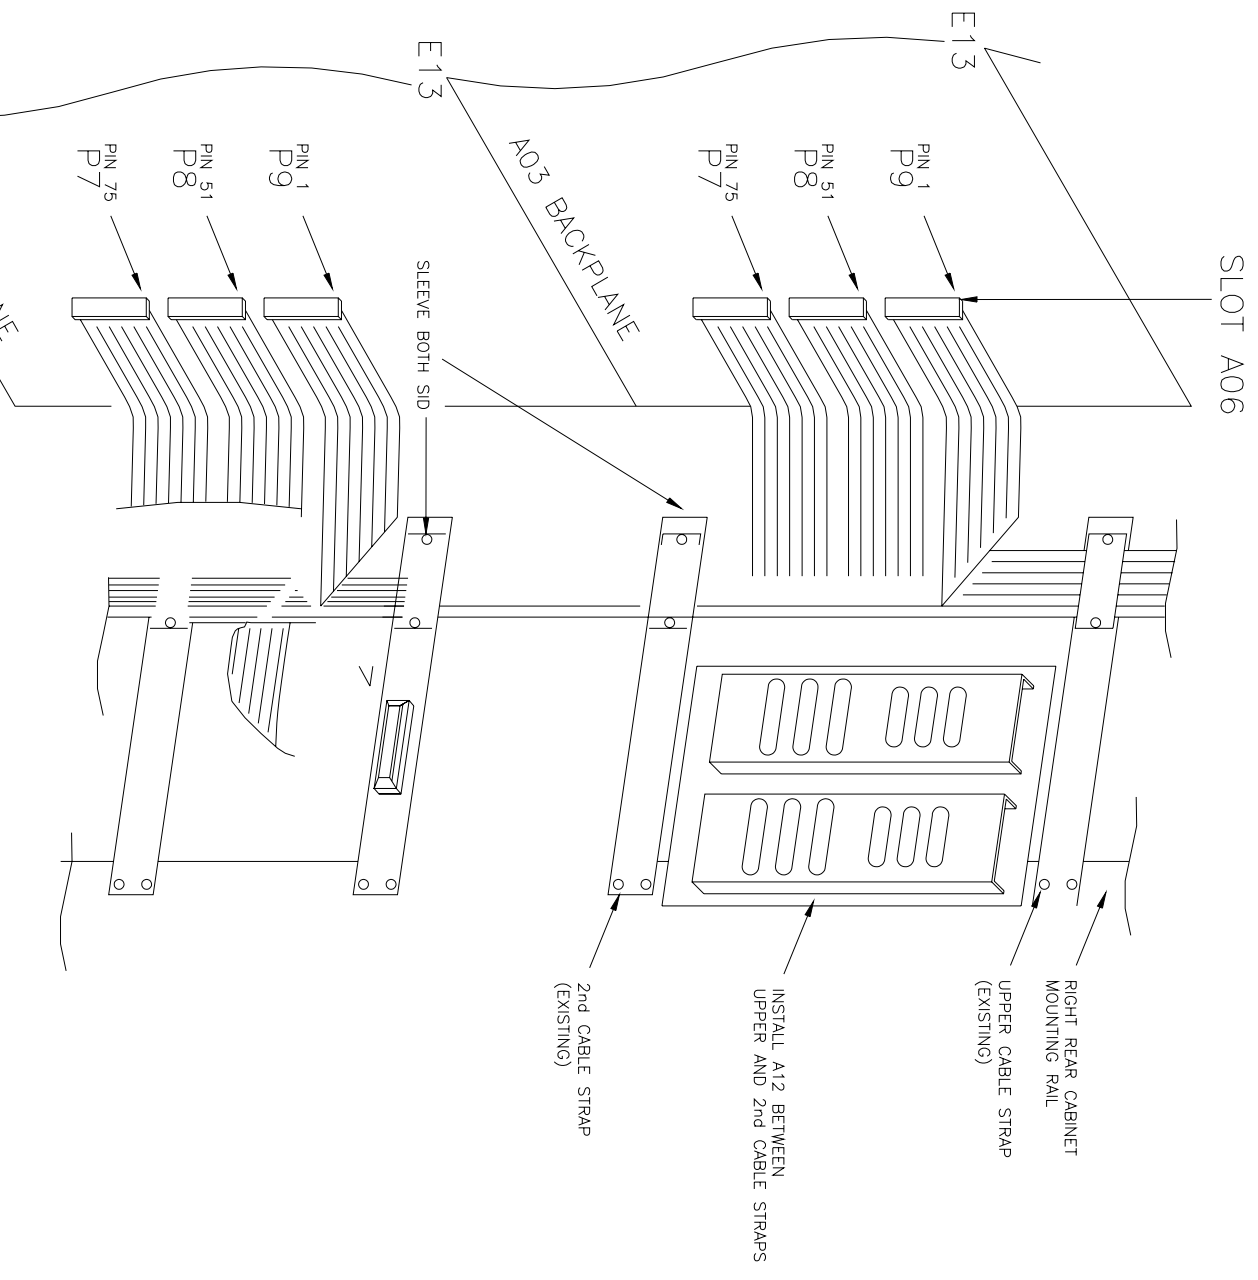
SCIP CABINET, RIGHT REAR VIEW, DOOR REMOVED
